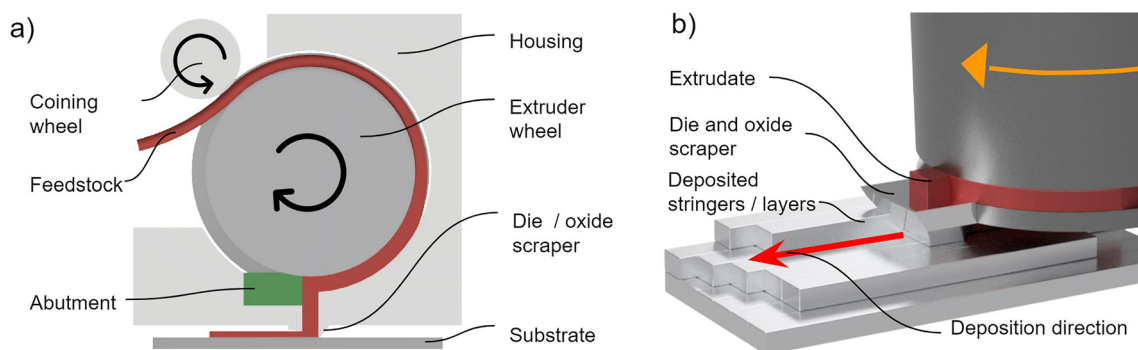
Principal illustrations of the extruder. a The extruder consists of a slotted wheel running over a stationary housing. A coining wheel is used to firmly press the wire into the slot, causing the rotating wheel to grip the wire. The extrusion pressure is built up as the material is
